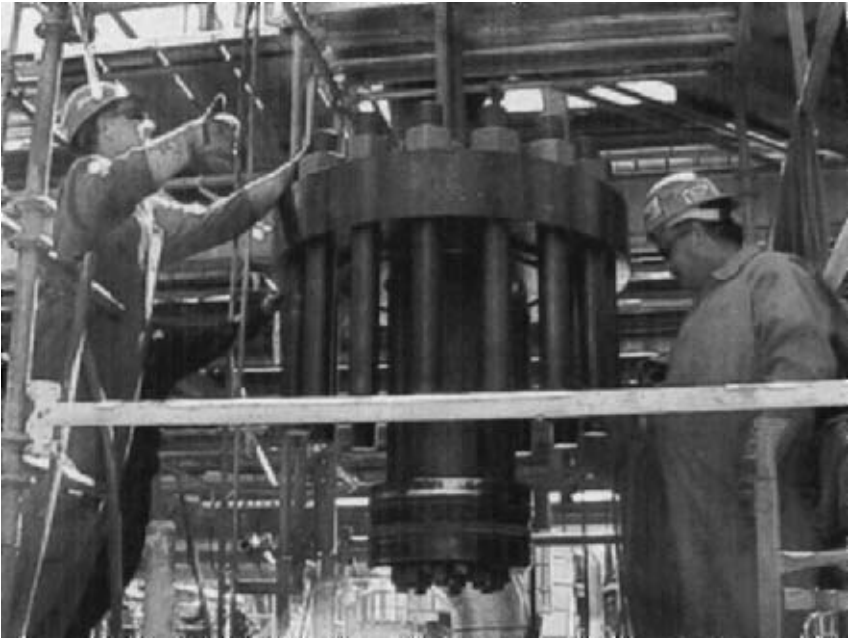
Special high lift flange test plug being installed. (Courtesy of Expansion Seal Technologies, Harleysville, PA.)
